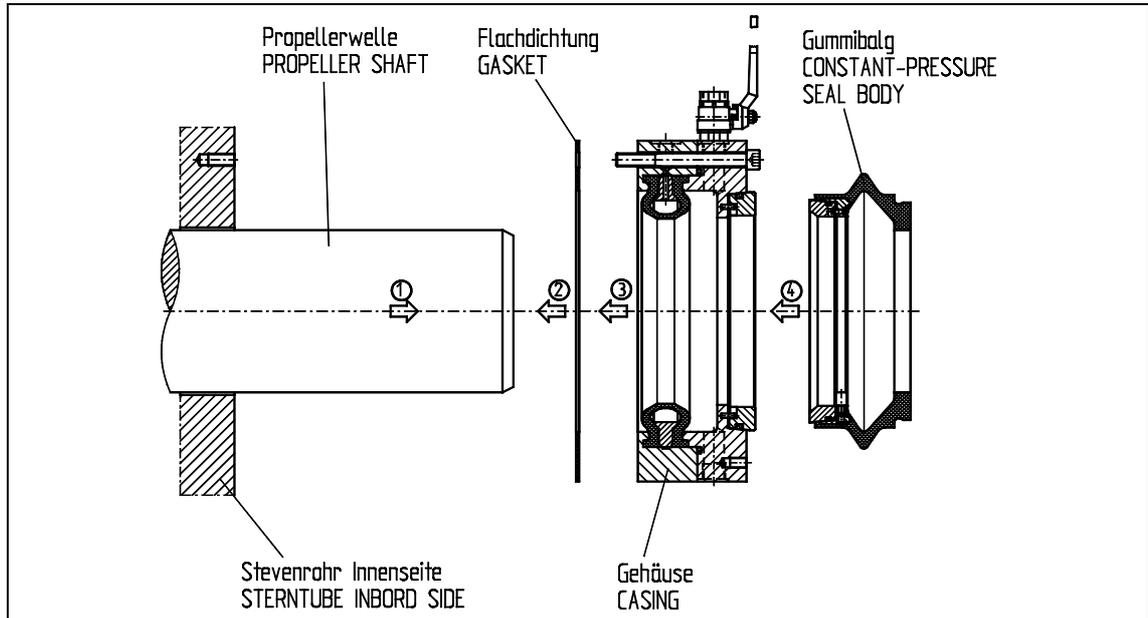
Fitting the Simplan Shaft fitted from aft/outboard
